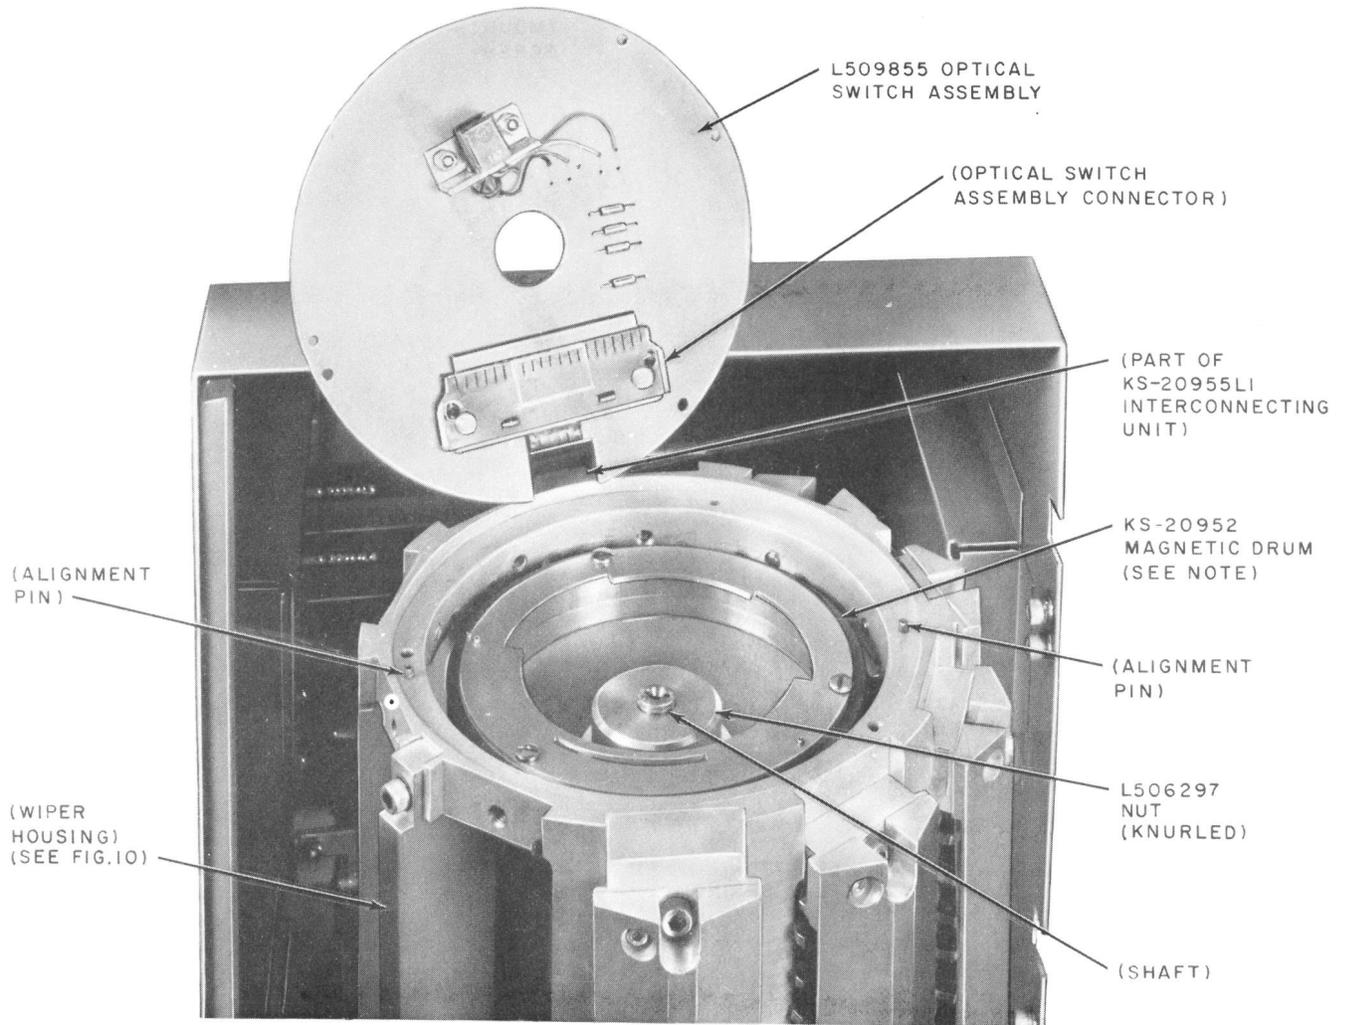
Top of Recorder Unit With Dust Cover Removed—Equipped With L-509855 Optical Switch Assembly
